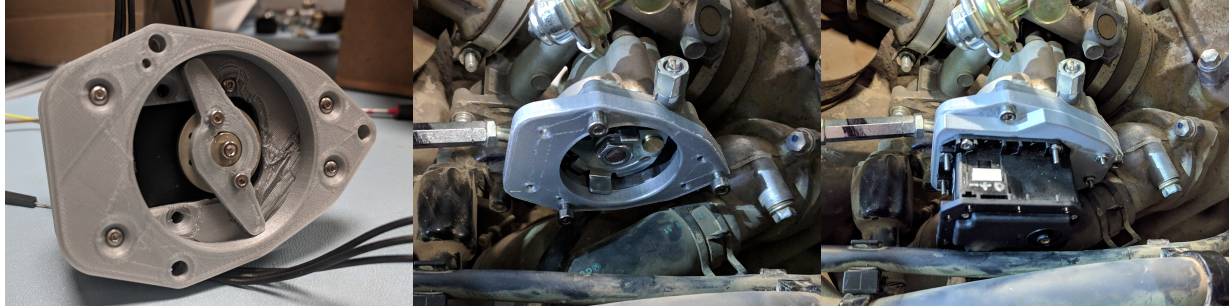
3D-printed prototype throttle actuator mounting adapter
